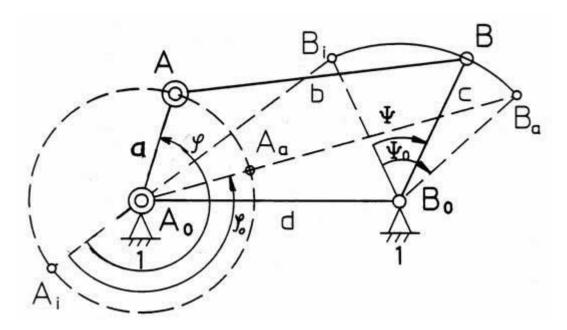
a) Crank-and-rocker (Four-bar linkage) A crankpin, B rockerpin, A_0 crank bearing, B_0 rocker bearing Length of: a crank, b coupler, c rocker, d housing ϕ_0 crank angle, Ψ_0 oscillating angle
